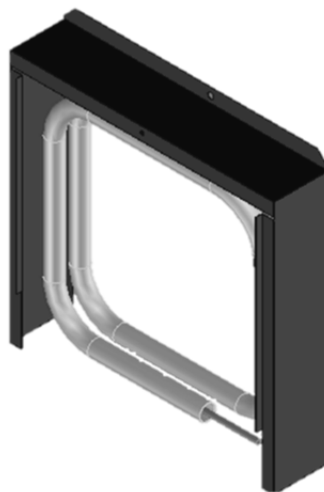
Proposal for installation of thermal storage tank 1 in duct spacer.
